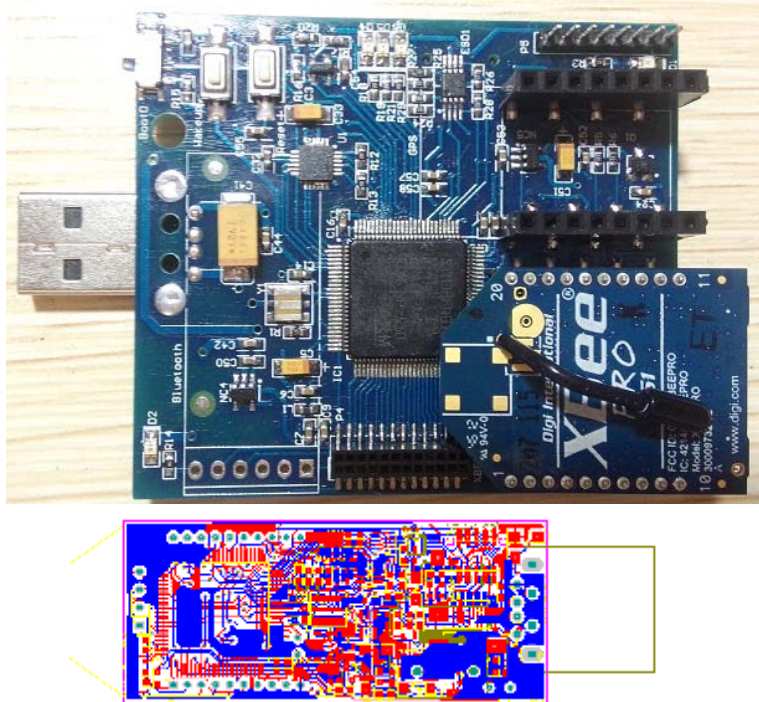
Top: Early IMU Prototype. Bottom: Second Iteration of the PCB layout.
